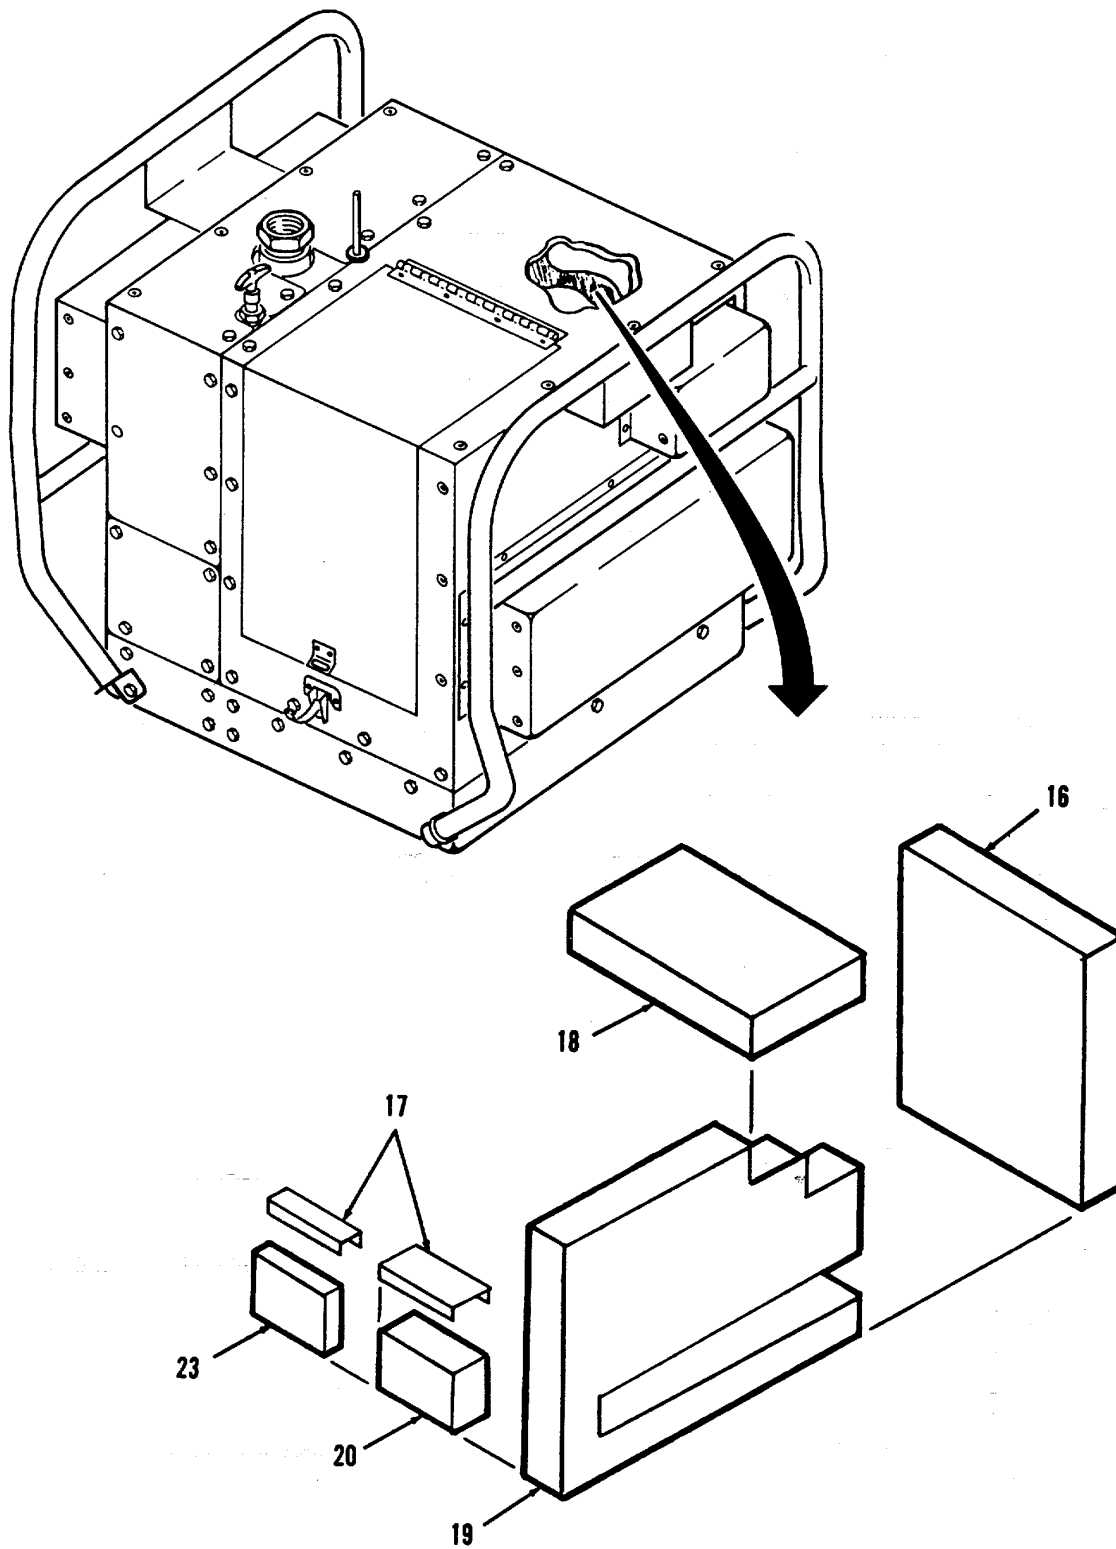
Enclosure Assembly Inlet Side (Sheet 2 of 3)
